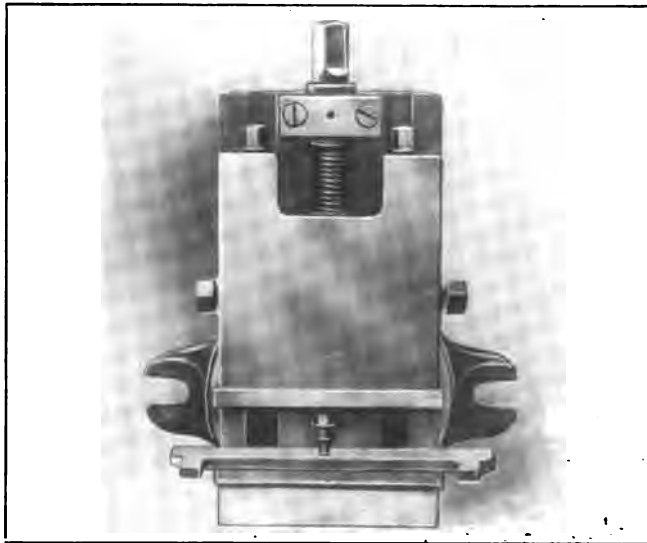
View of Machine Vise, showing a Gage Clamped without Springing it.
